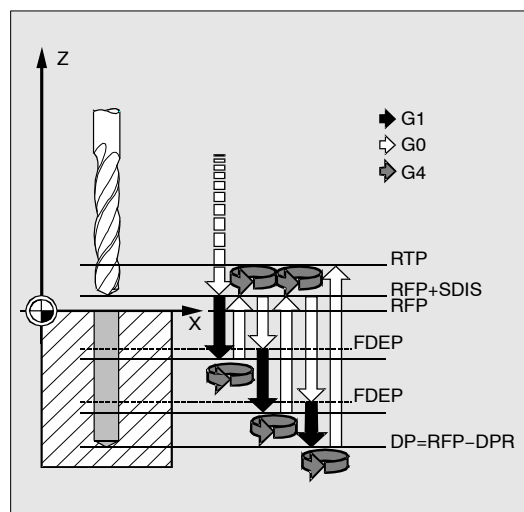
Deep hole drilling with swarf removal (VARI=1)
